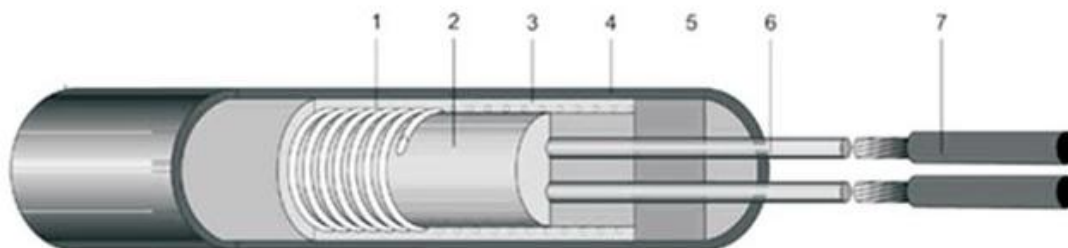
Cross section view of heater rod design. Image courtesy of Bucan
